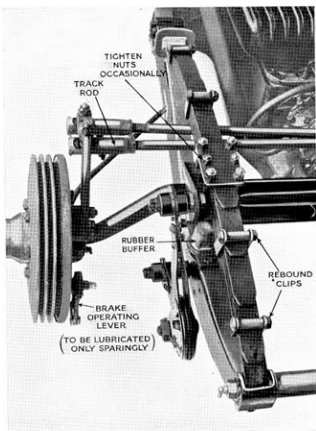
Underneath view of the off side of the frame, showing steering connections on the track rod and threaded push rod. Six spring clip bolts require tightening occasionally.
